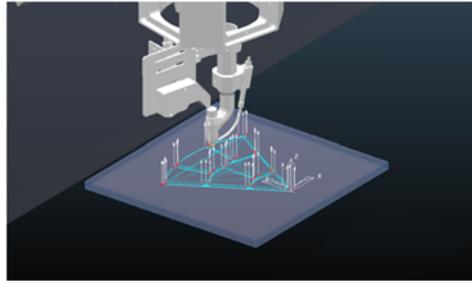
Tool-path planning definition using Powermill® CAD/CAM software.
